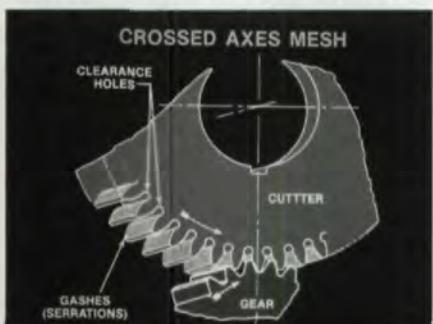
Work gear in crossed-axes mesh with rotary shaving cutter mounted above.
